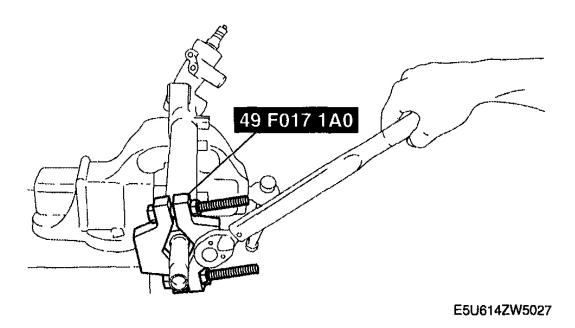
Removing Holder Using SST Courtesy of MAZDA MOTORS CORP.
